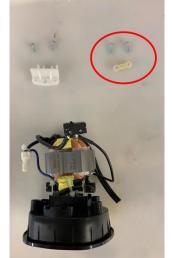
Exploded view of the cable holder with additional screws and support motor assembly
